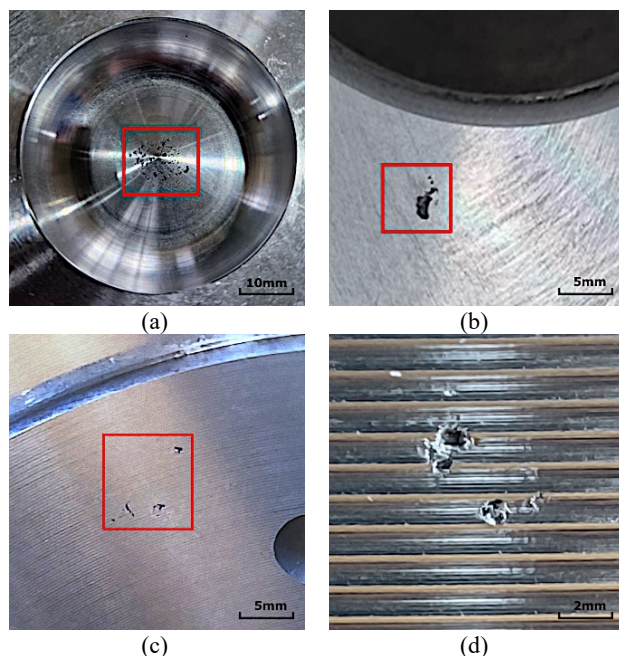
Casting defects revealed after machining in important piston parts: combustion chamber (a), piston head (b), piston pin hole (c), piston skirt (d) [unpublished own research]
